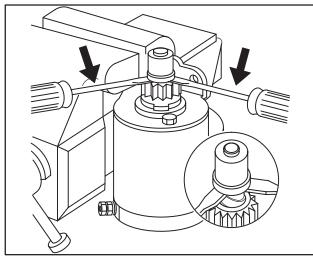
REMOVING CAP ASSEMBLY (SOME MODELS)
